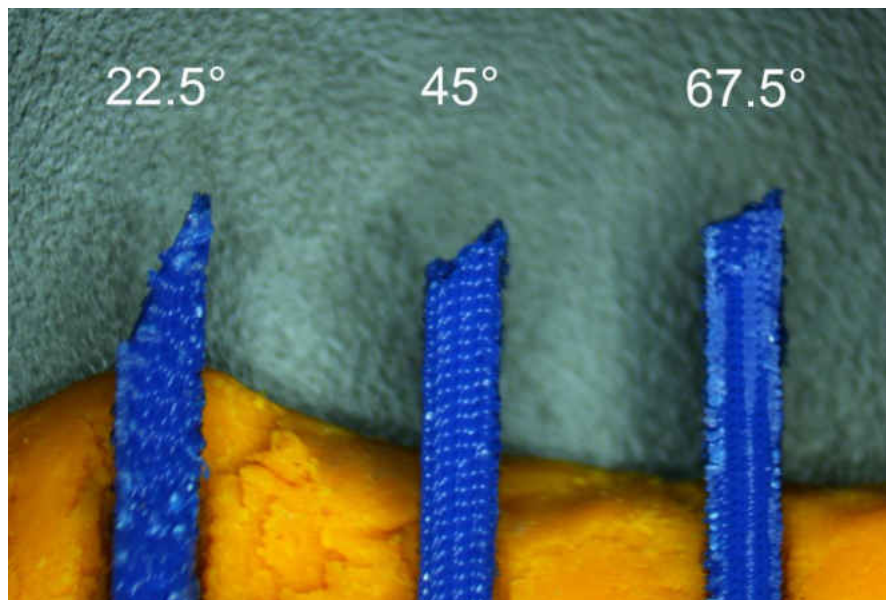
Side view of ZX+45 plane specimen failure surfaces
